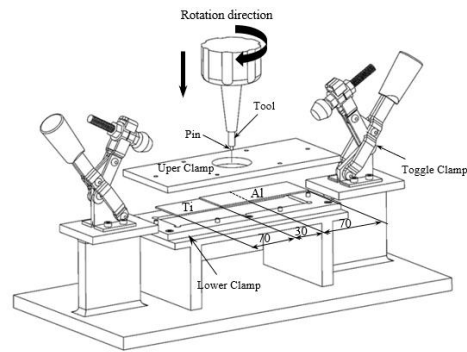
Symmetric diagram of friction stir spot welding in the experimental (mm)
